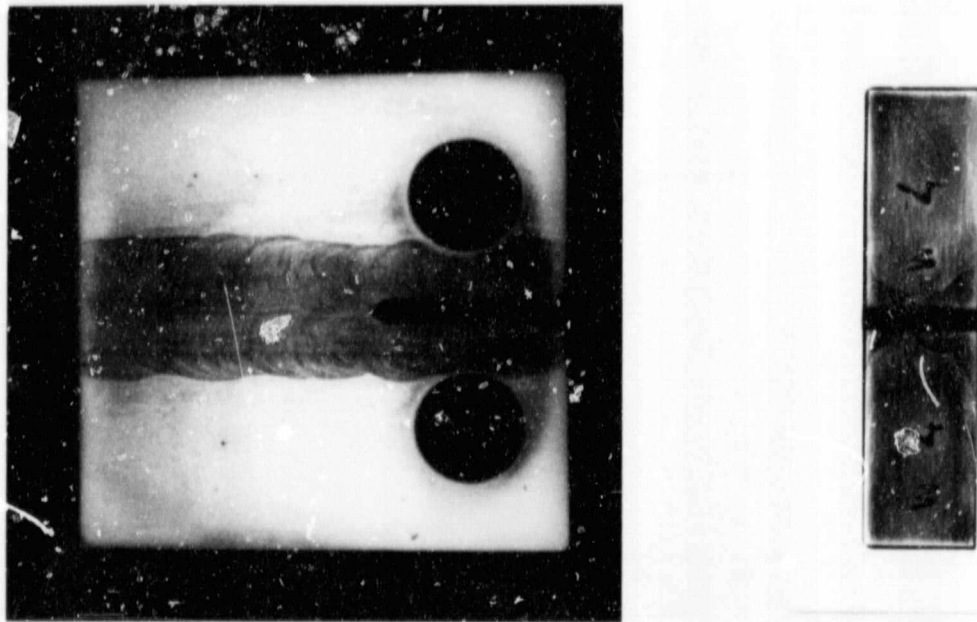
The location of the notch in the welded CT specimen used in this work (actual size).
